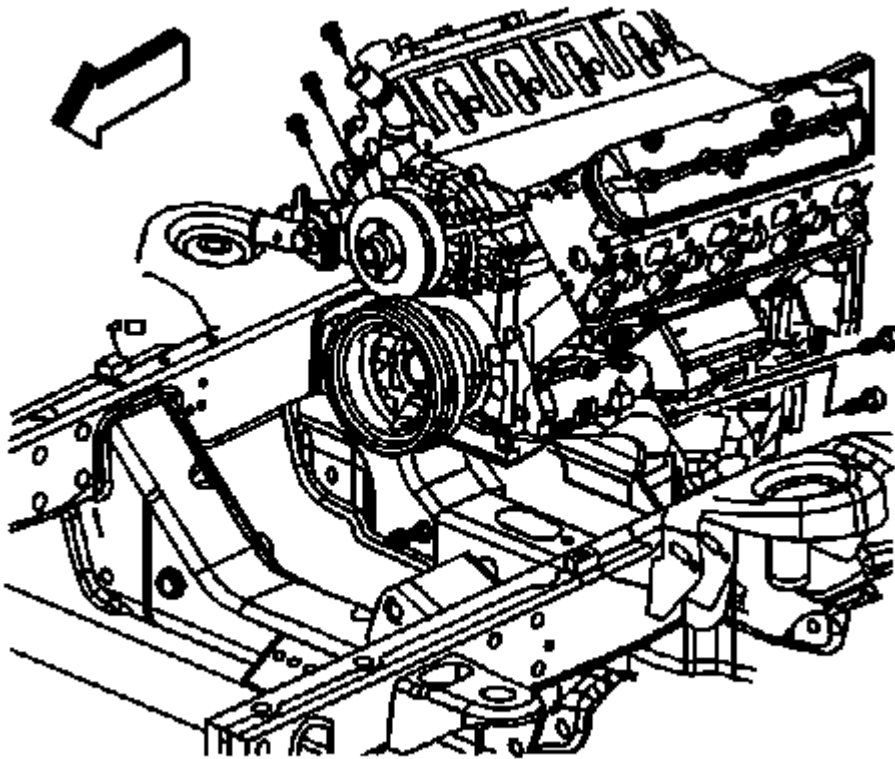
Identifying Engine Mount Bracket Mounting Nuts
